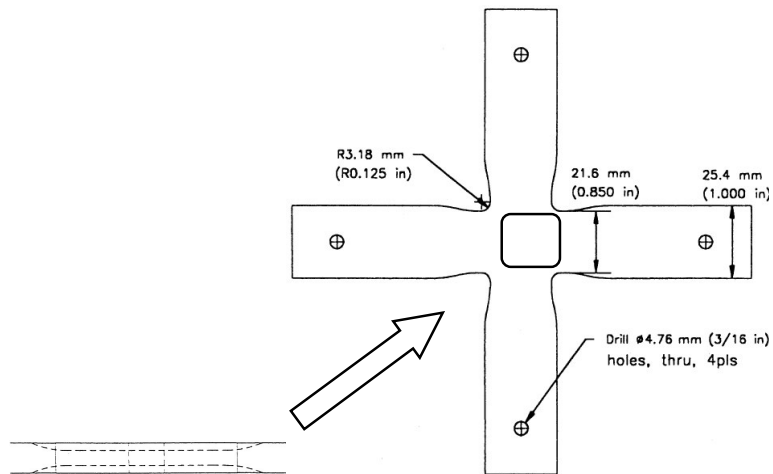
Typical cruciform specimen with reduced thickness gauge section
